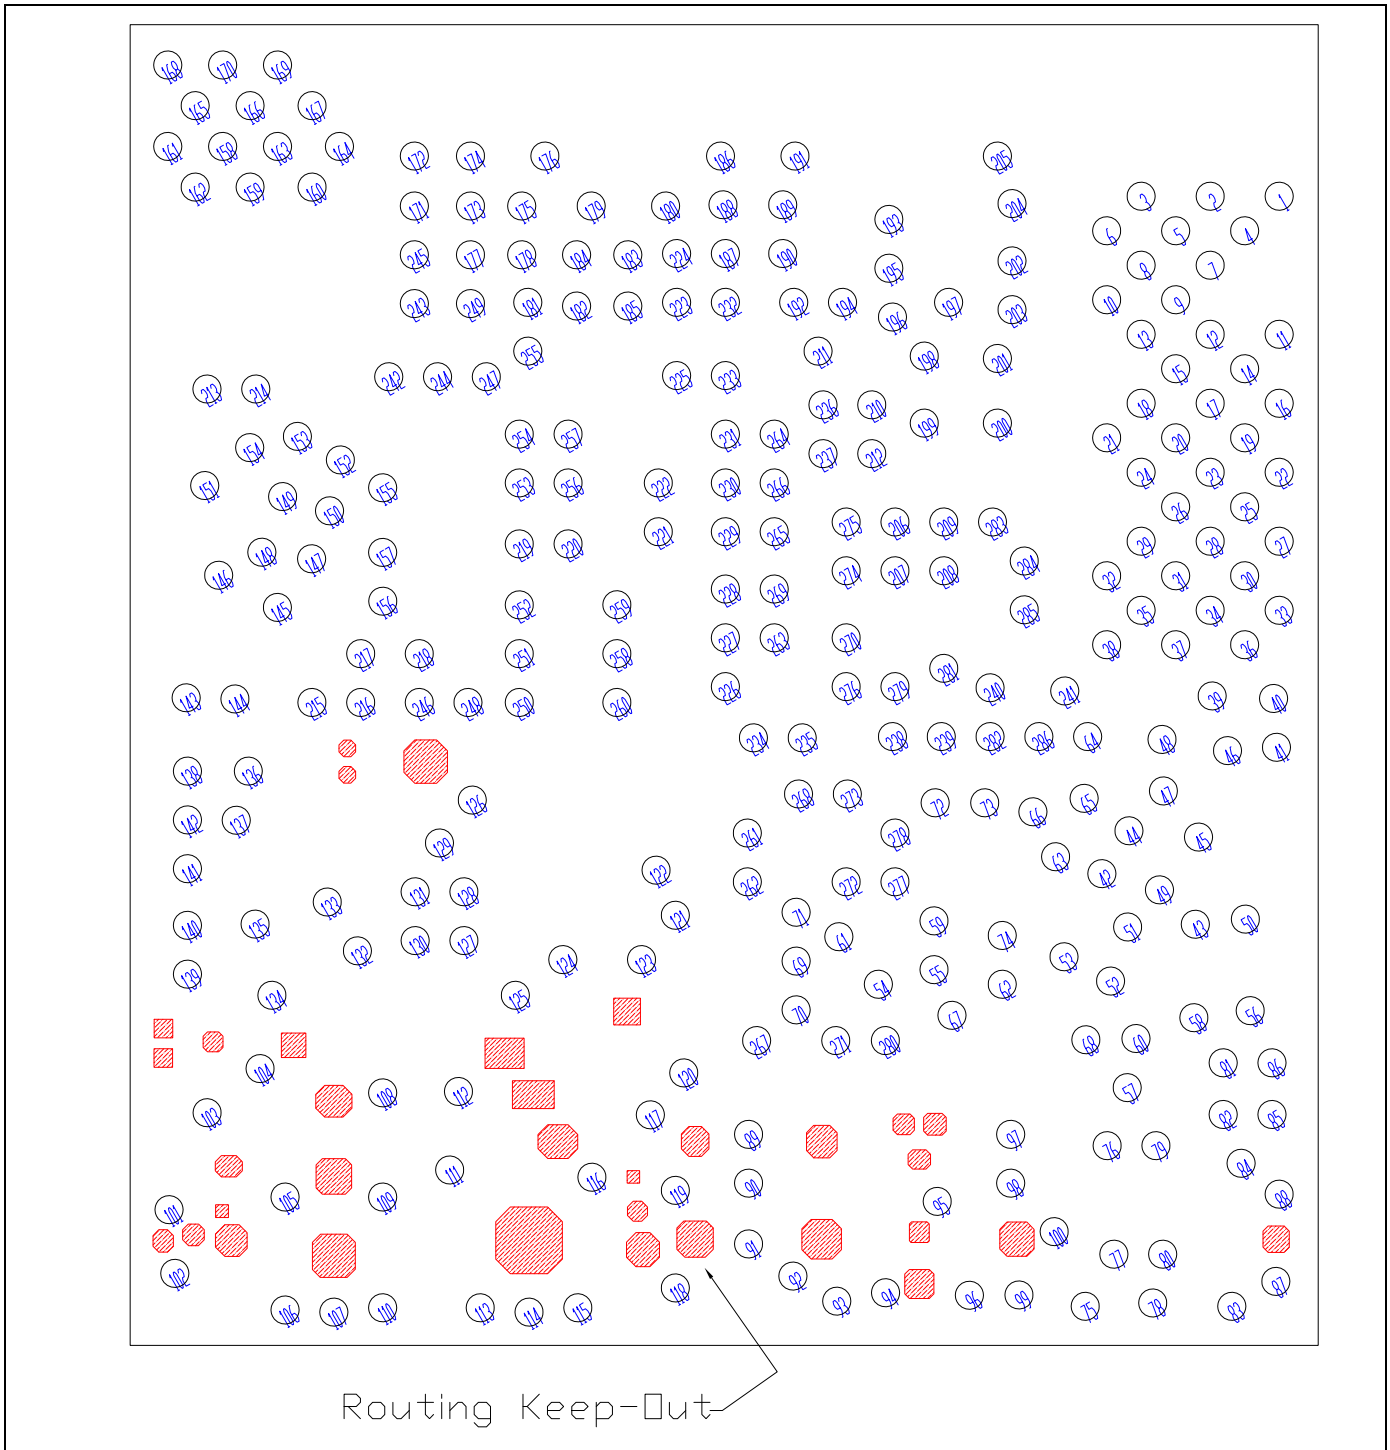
WLCSP Keep-out Areas for PCB Layout—Bottom View with Bumps Facing Up
